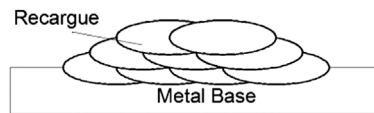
Outline of the pure weld coupon. Recargue = Overlay; Metal Base = Base Metal.
